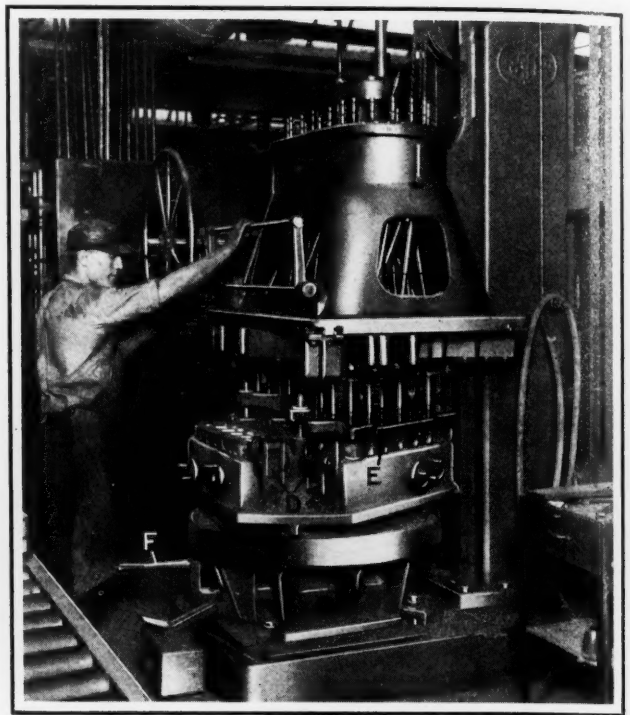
Drilling Twenty-eight Holes in Two Steps on a Multiple-spindle Drilling Machine equipped with a Three-station Jig
